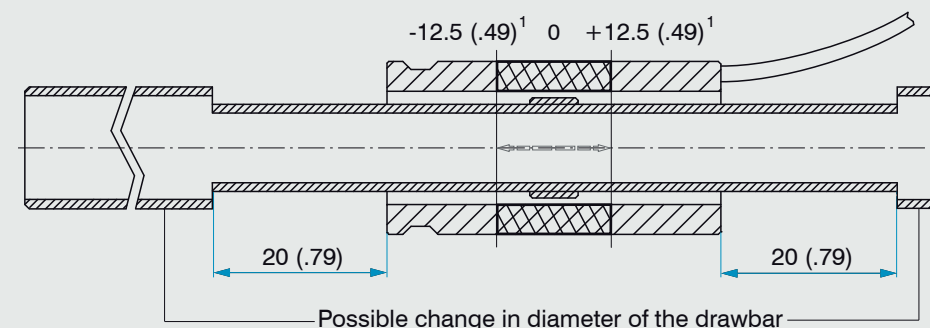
Dimensions of drawbar connection based on the example of LVP-25-Z20
